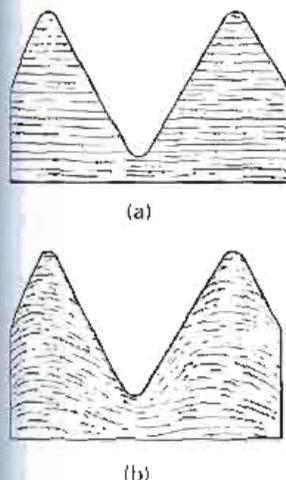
Schematic comparison of the grain flow in machined thread (a) and a rolled thread (b). The rolling operation further deforms the initial structure produced by the previous wire- or rod-forming operations, while machining simply cuts through it.
